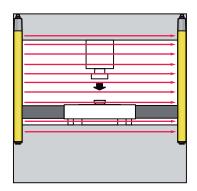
Fixed blanking: mechanical locks prevent side access to the protective field No "shadows" may form in the protective field.
